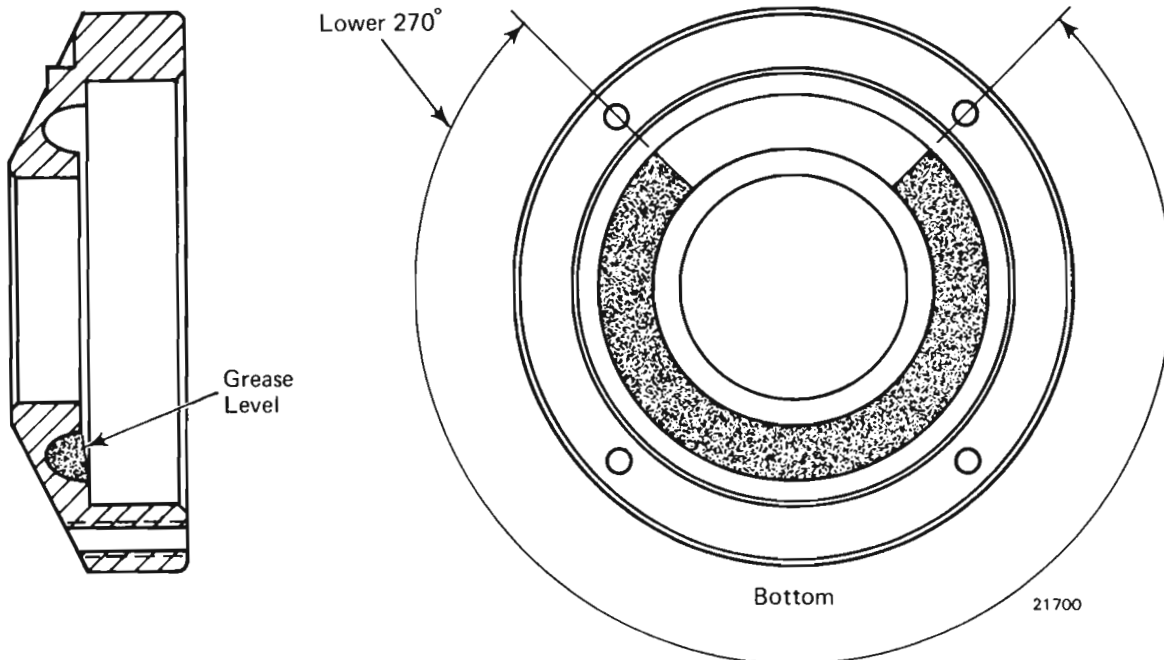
End Frame And Bearing Housing Grease Cavity (New Style Only)
